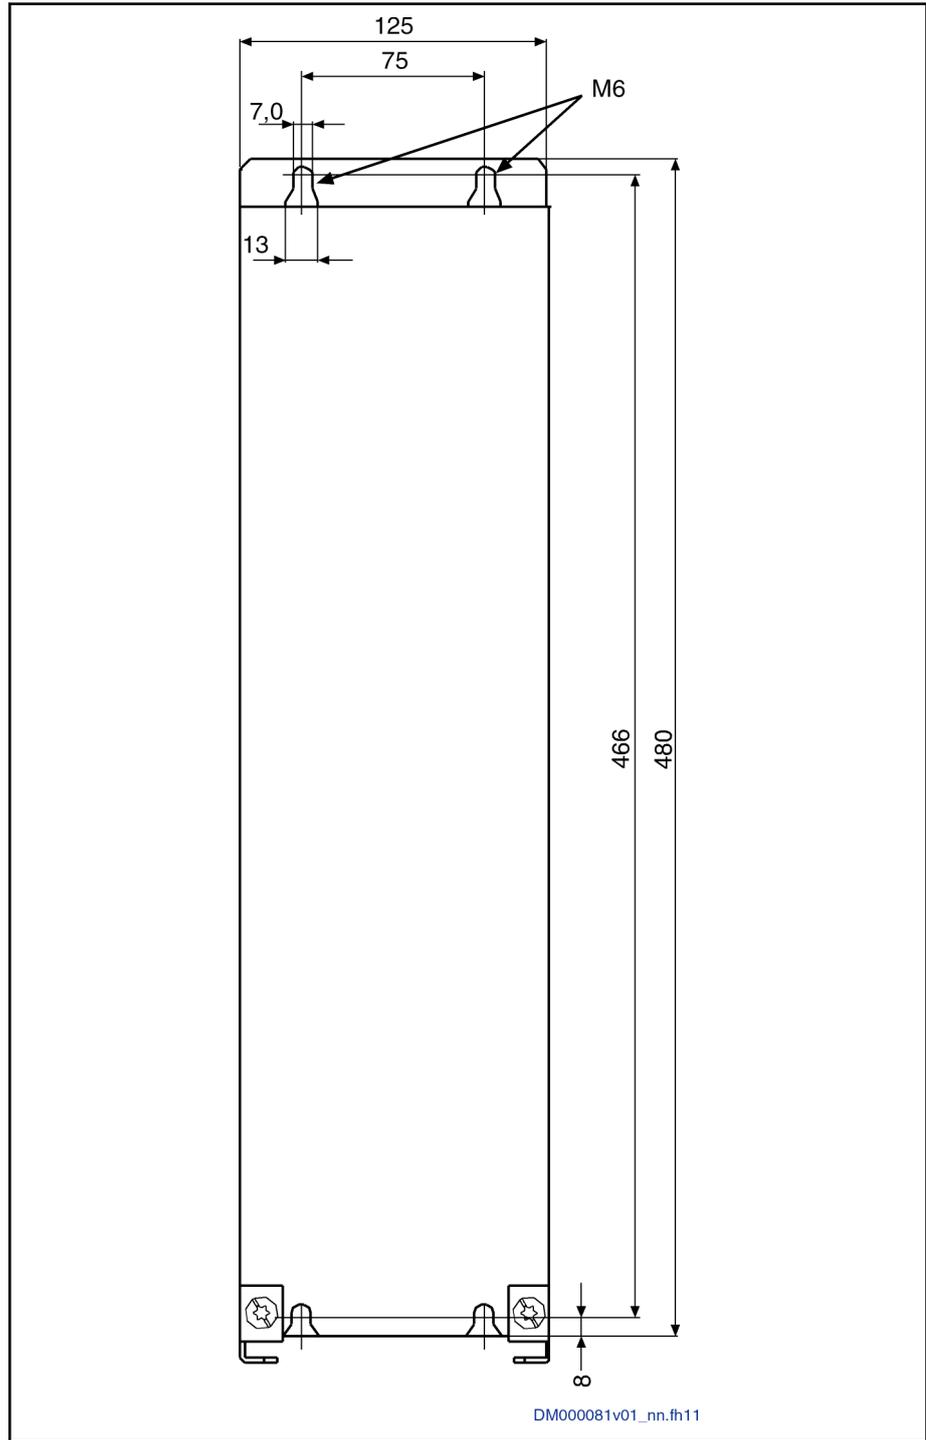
Boring dimensions HCS03.1E-W0070
